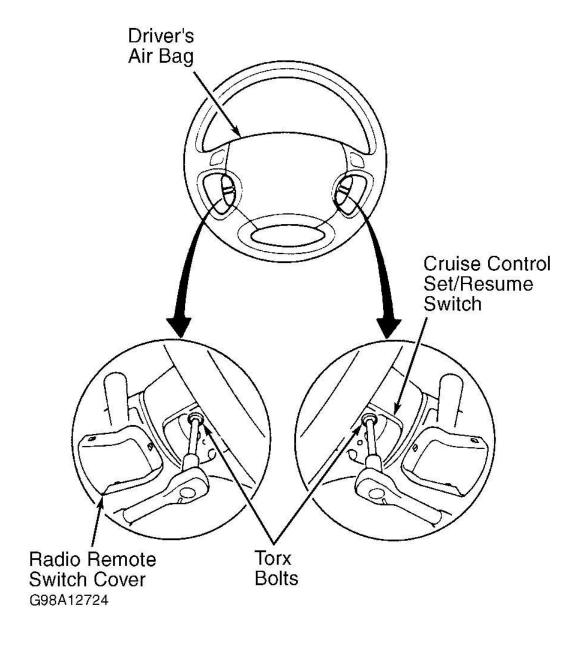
Removing Driver-Side Air Bag Assembly (All Models) Courtesy of AMERICAN HONDA MOTOR CO., INC.
